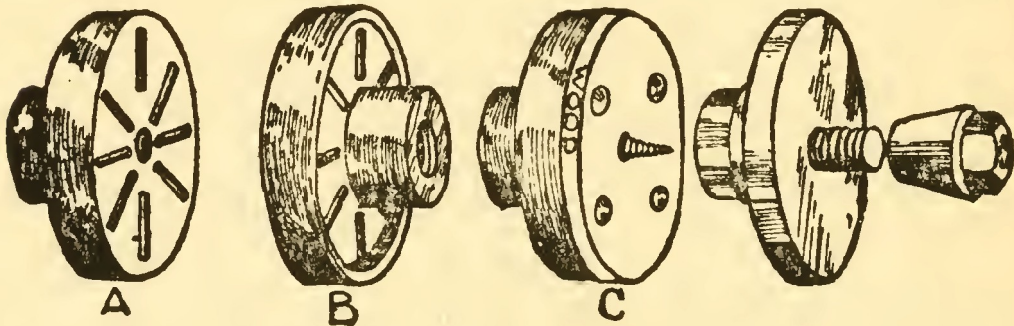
FACE PLATE : A, FRONT VIEW ; B, BACK VIEW ; C, FRONT VIEW WITH WOOD FACE.
